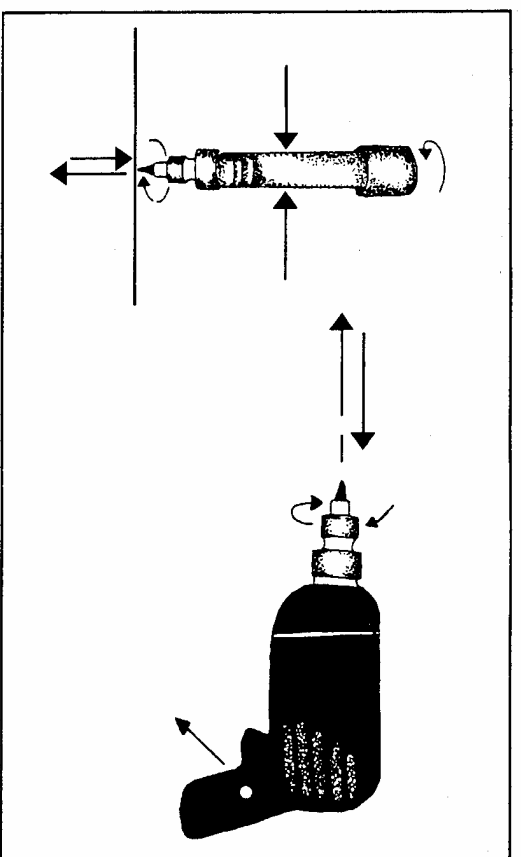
Reaction force and torque act differently against the hand tool operator with a pistol grip and in-line power hand drill.
